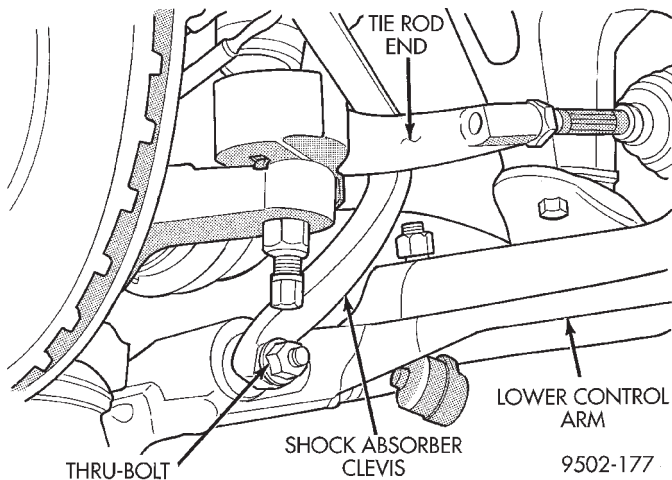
Clevis To Lower Control Arm Attaching Bolt
